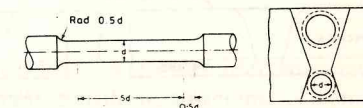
Specimen No. 1 tensile test for all-weld metal
